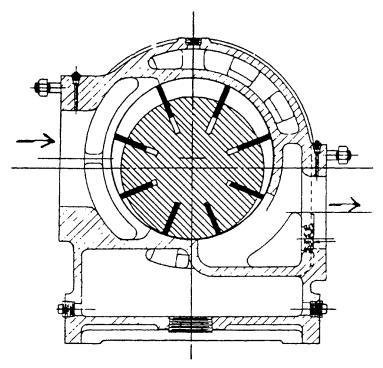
Cross section of a sliding vane compressor (courtesy of A-C Compressor Corporation, Milwaukee, Wisconsin).²
